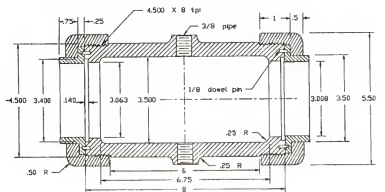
Cut away view of GERC confinement cell (all dimensions in inches)
